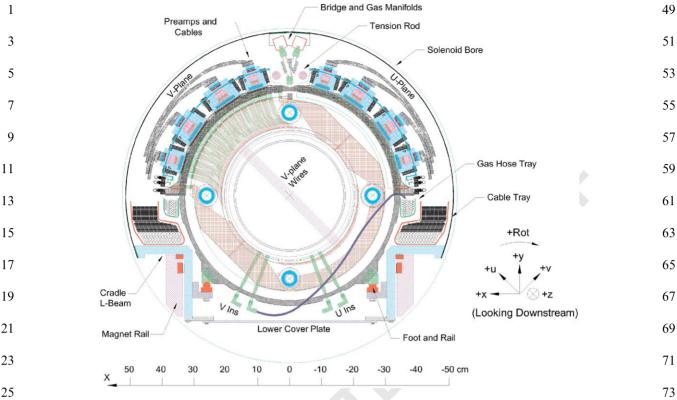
Front view of DC module in the cradle and magnet rail structure (looking downstream). The coordinate system is indicated.
